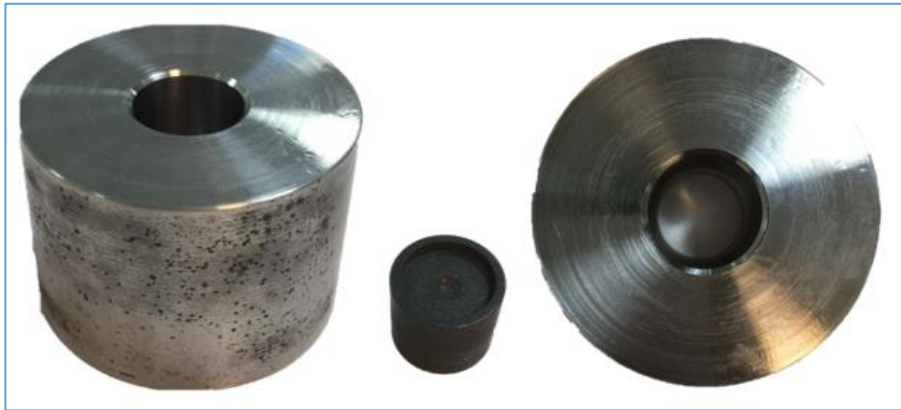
Final states of permanent molds used for squeeze casting near-net shape piston studied in this work.
